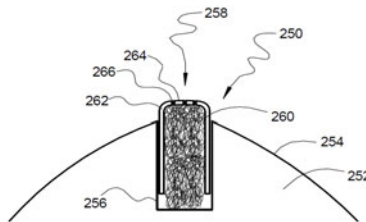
sealing element with steel wool filler. Where: 252 – rotating piston; 258 – sealing element; 262 – flexible steel sheet; 260 – steel wool; 266 – micropores for lubrication; 256 – channel for sealing element (with oil source - not shown);
